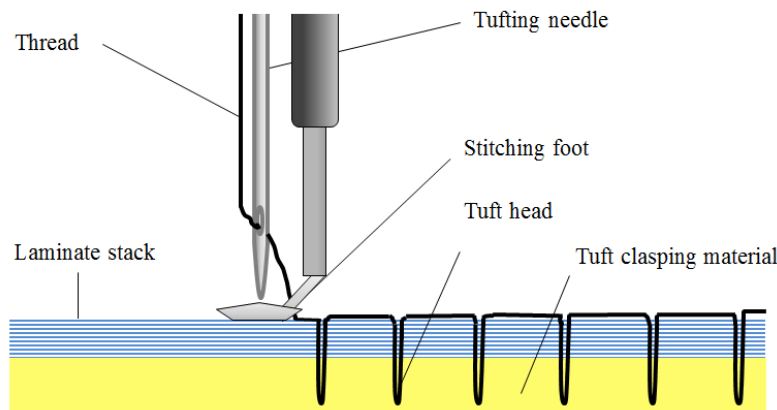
Diagram demonstrating the arrangement of the thread in the tufted preform
